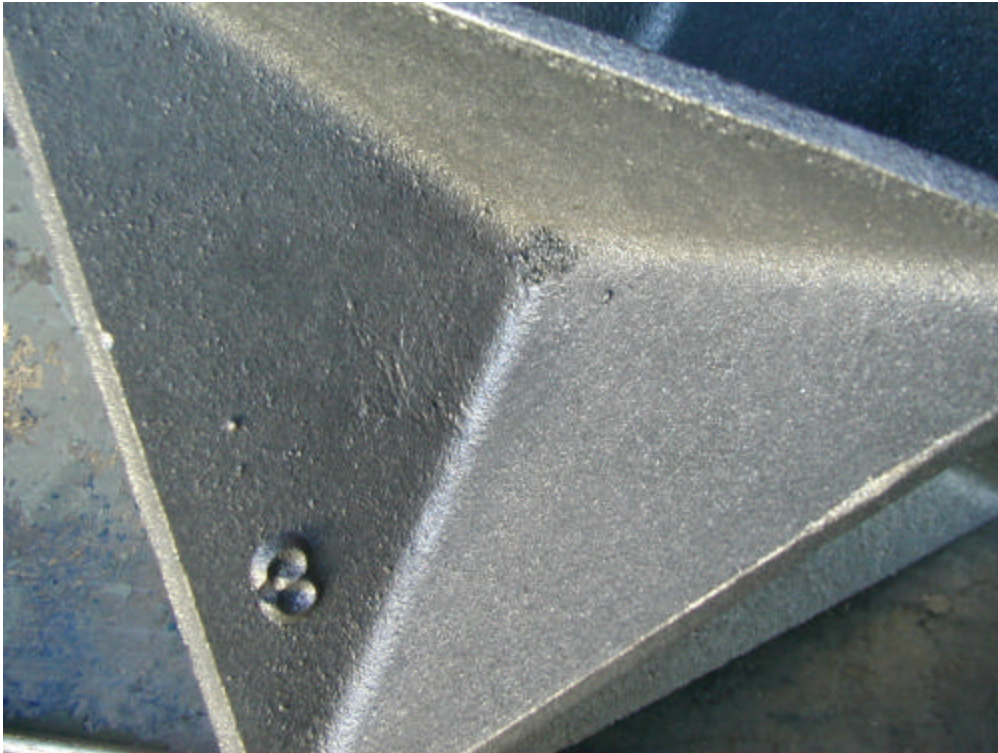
Mold FN005 cavity 3 casting ranked 6 of 9
